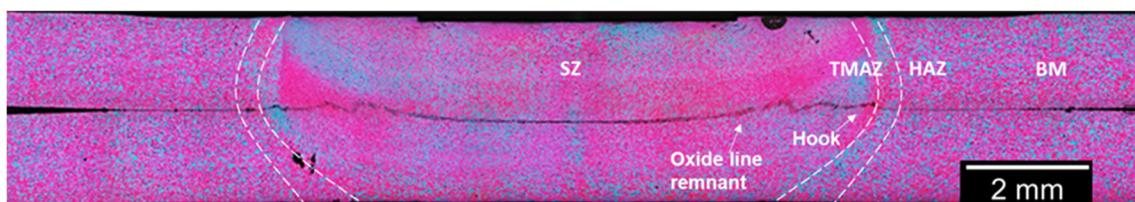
Macrograph by optical microscopy of the cross-section of the defect-free welded joint performed by the load-controlled process.
